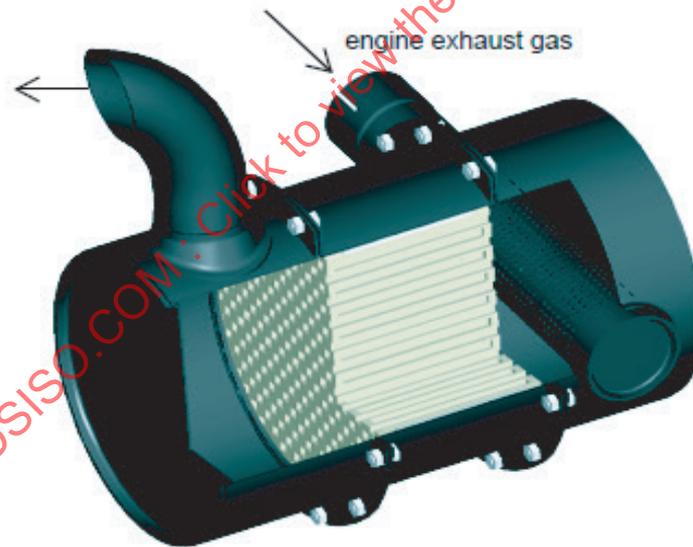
Example of diesel particulate filter (DPF, 3.2.14) — Cut-out view
